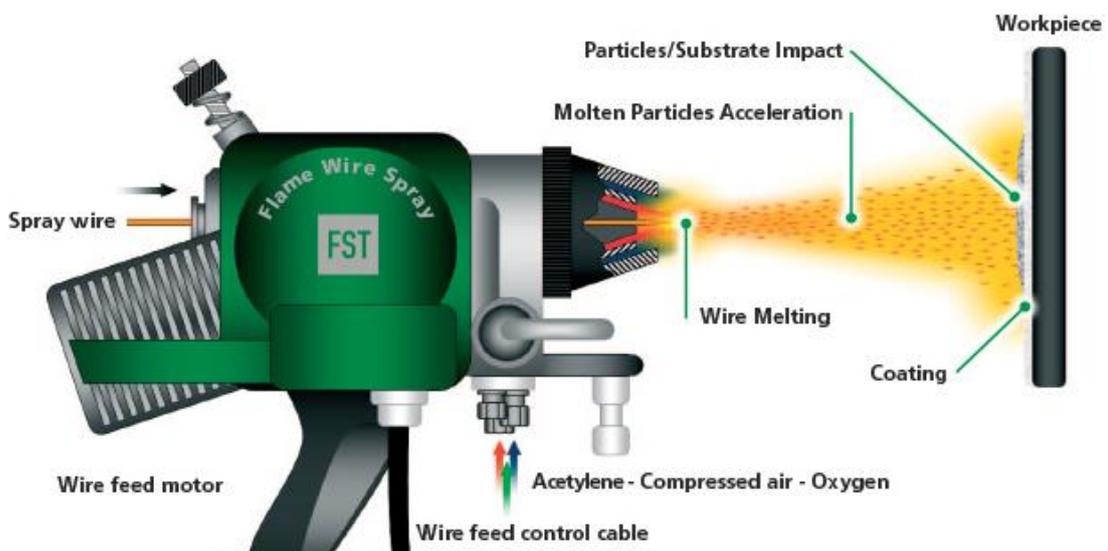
A Spray Gun for Flame Wire Spray method [2]
